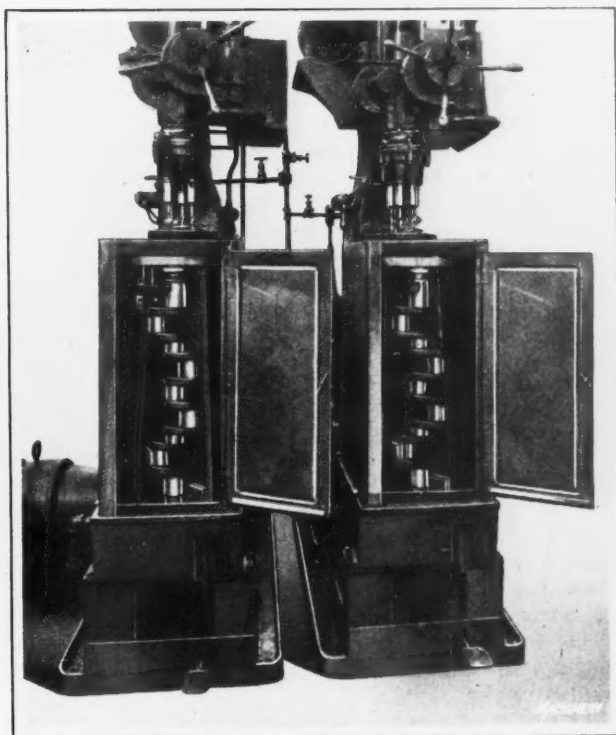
Drilling Machines and Special Jigs employed for producing the Nine Holes in the Flange for the Flywheel
